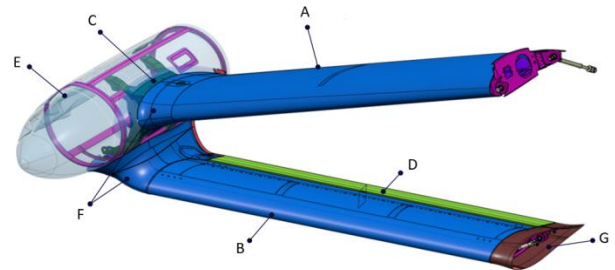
ASTRAL wing basic arrangement: (A) upper wing, (B) lower wing, (C) cradle, (D) trim flap, (E) nacelle, (F) fairings and (G) sponson cover.
